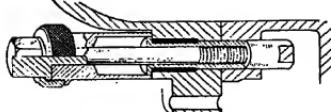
Hollow flanged dowel that locates gear and crankcases.
